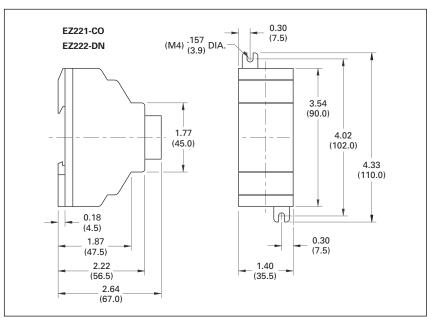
EZ221-CO/EZ222-DN Series Dimensions in Inches (mm), Drawing Number MD05013010E
